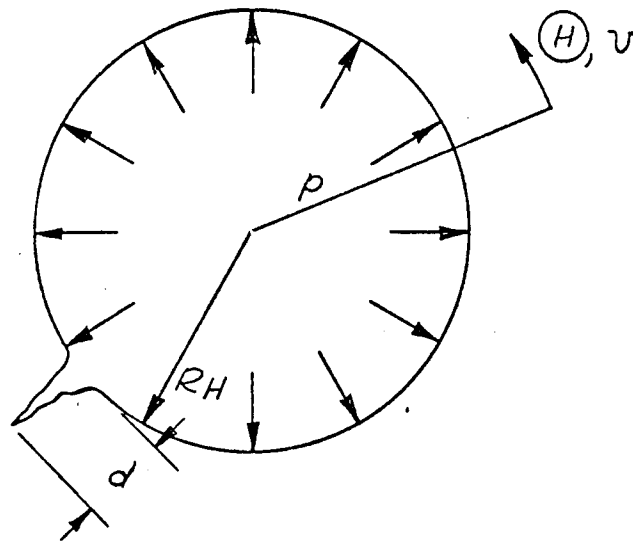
FASTENER HOLE WITH CRACK
